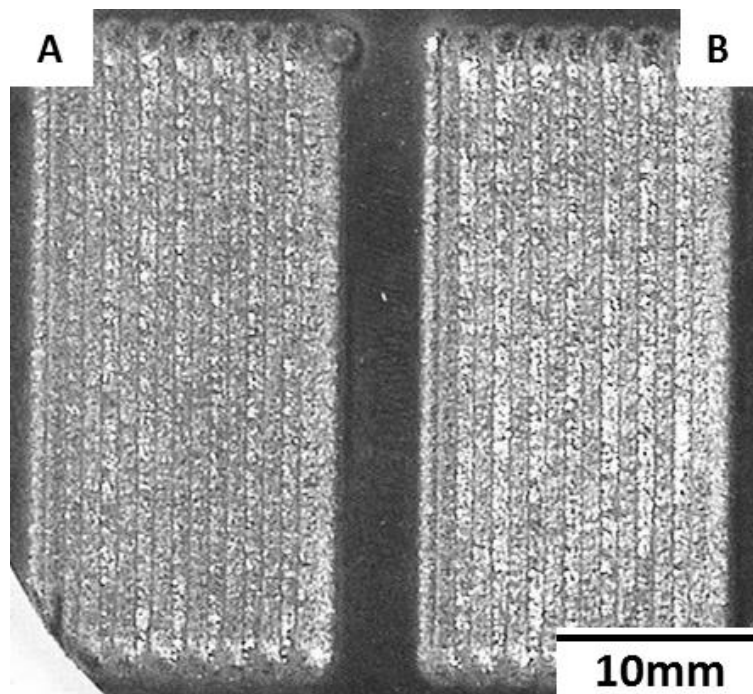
General appearance of laser cladding coatings before machining: A)  $P=400W$ ; B)  $P=600W$ .
